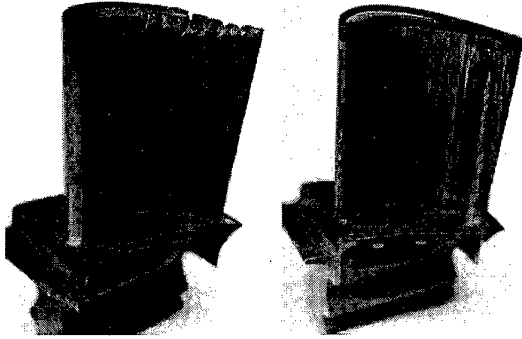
Weld tip repair of DS René 80 first stage turbine blade form CF F404 engine (Courtesy Liburdi Engineering, Hamilton, Ontario)
